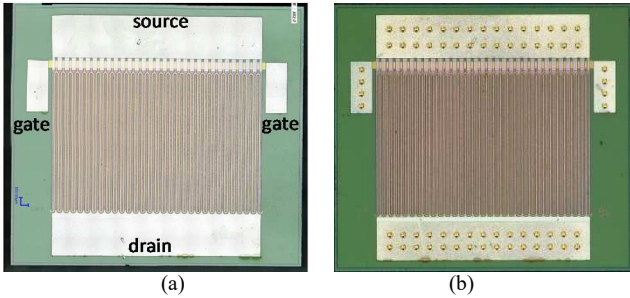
(a) photograph of the HEMT bare die, and (b) GaN HEMT with added solder bumps.
